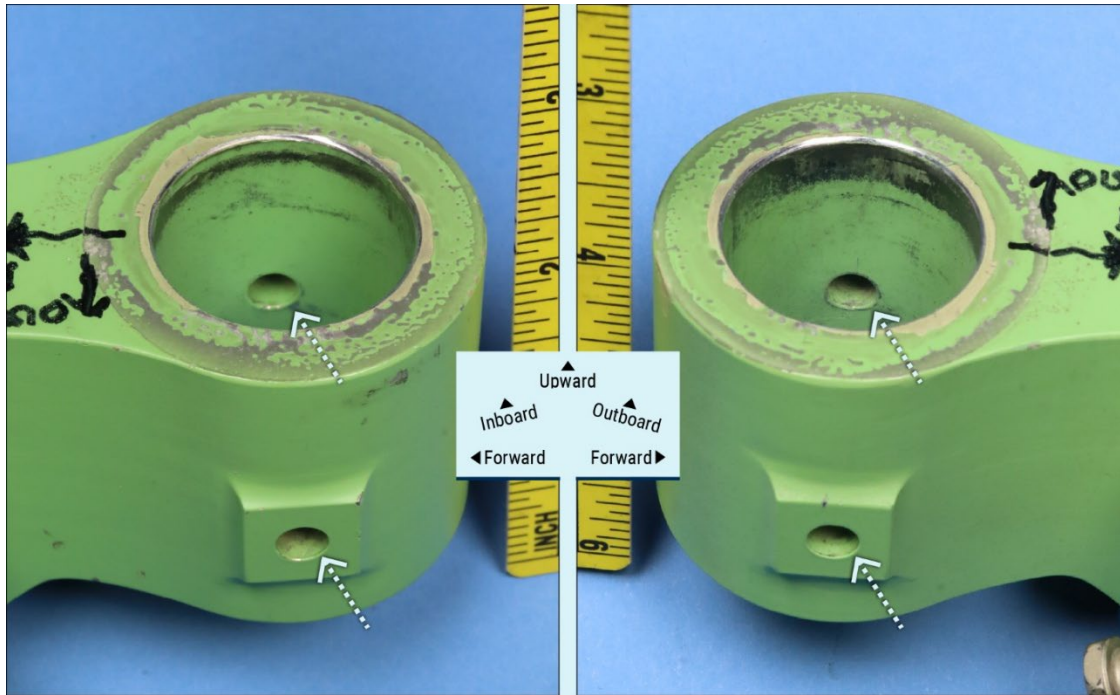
Photographs showing two views of the vertical movement arrestor bolt holes.
